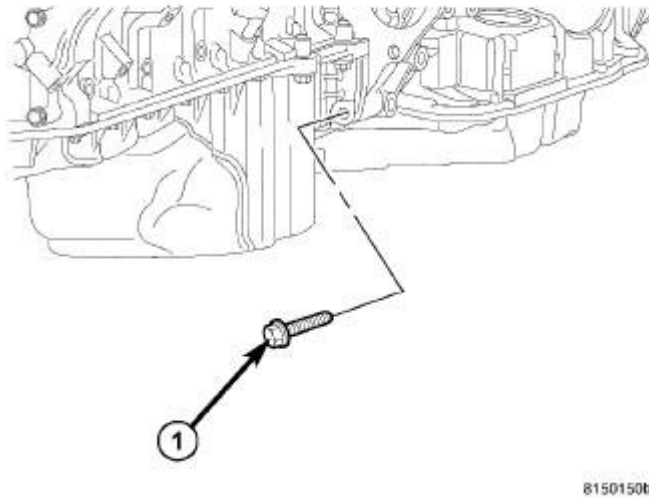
OIL PAN TO TRANSMISSION BOLTS
